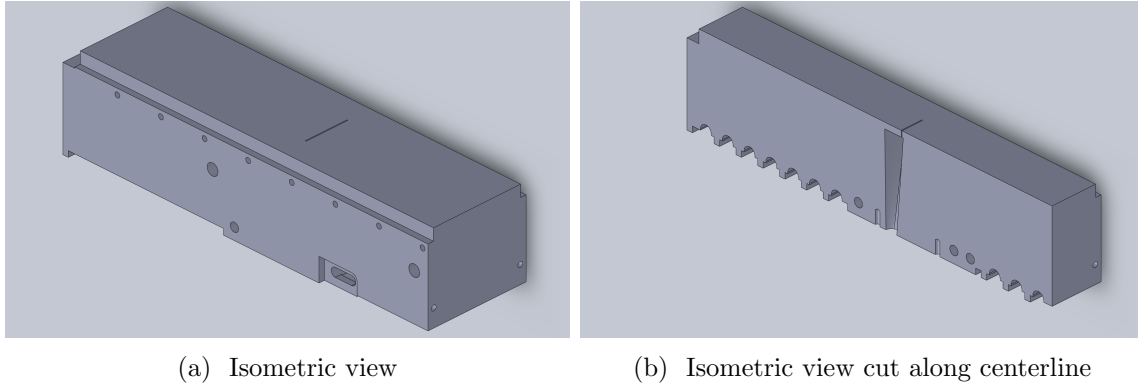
Drawing of test block geometry used in the Finite Element Analysis of 1-D Heat Flux Assumption
